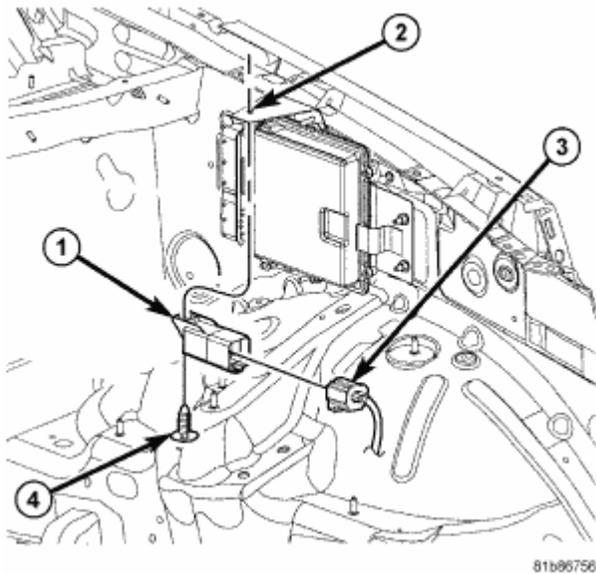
Identifying Glow Plug Relay (Module), ECM Mounting Bracket, Electrical Connector & Pin
